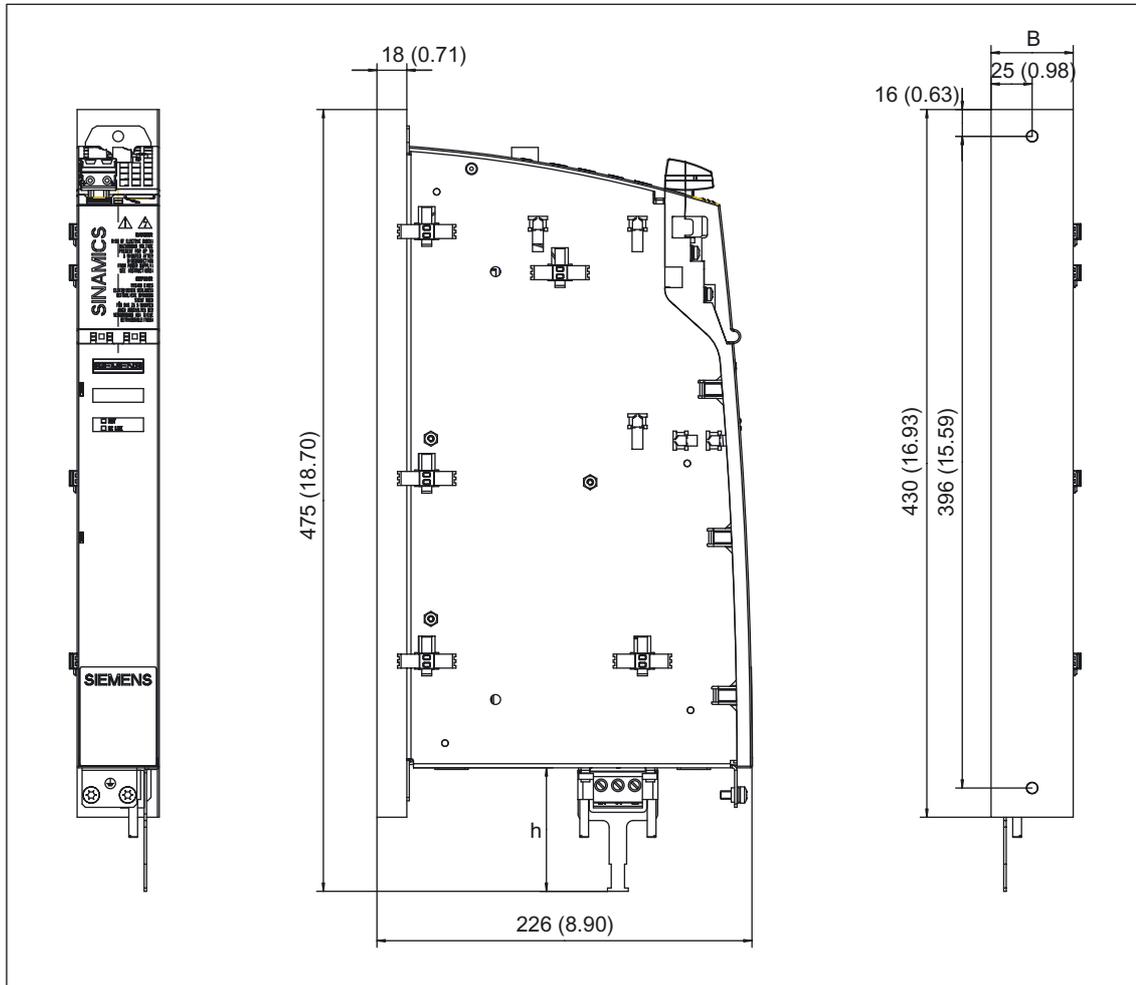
Dimension drawing of Smart Line Module with cold plate (5 kW and 10 kW), all dimensions in mm and (inches)
